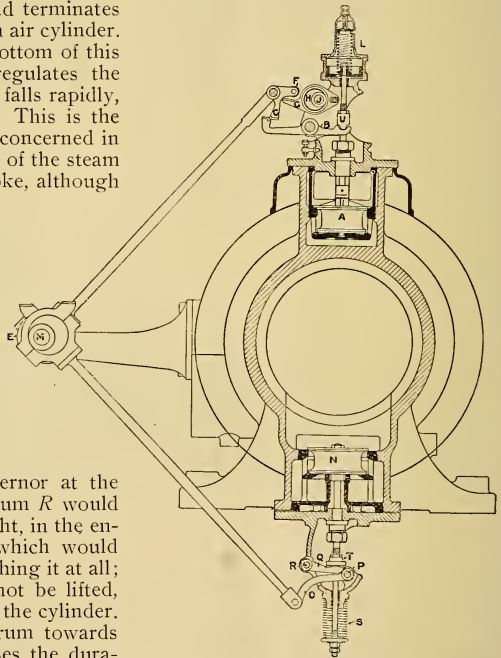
CROSS-SECTION OF ENGINE CYLINDER WITH MARSHALL'S TRIP GEAR
